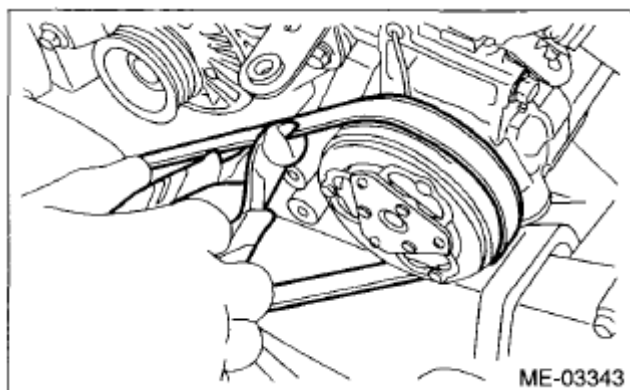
Cutting Rear Side Belt With Wire Cutter
